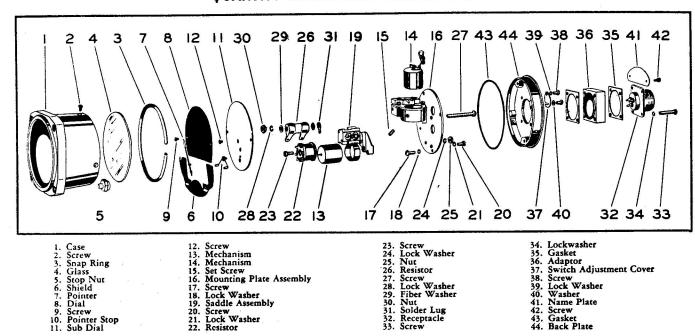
AN)-1. Exploded View of EA303AN Indicator
